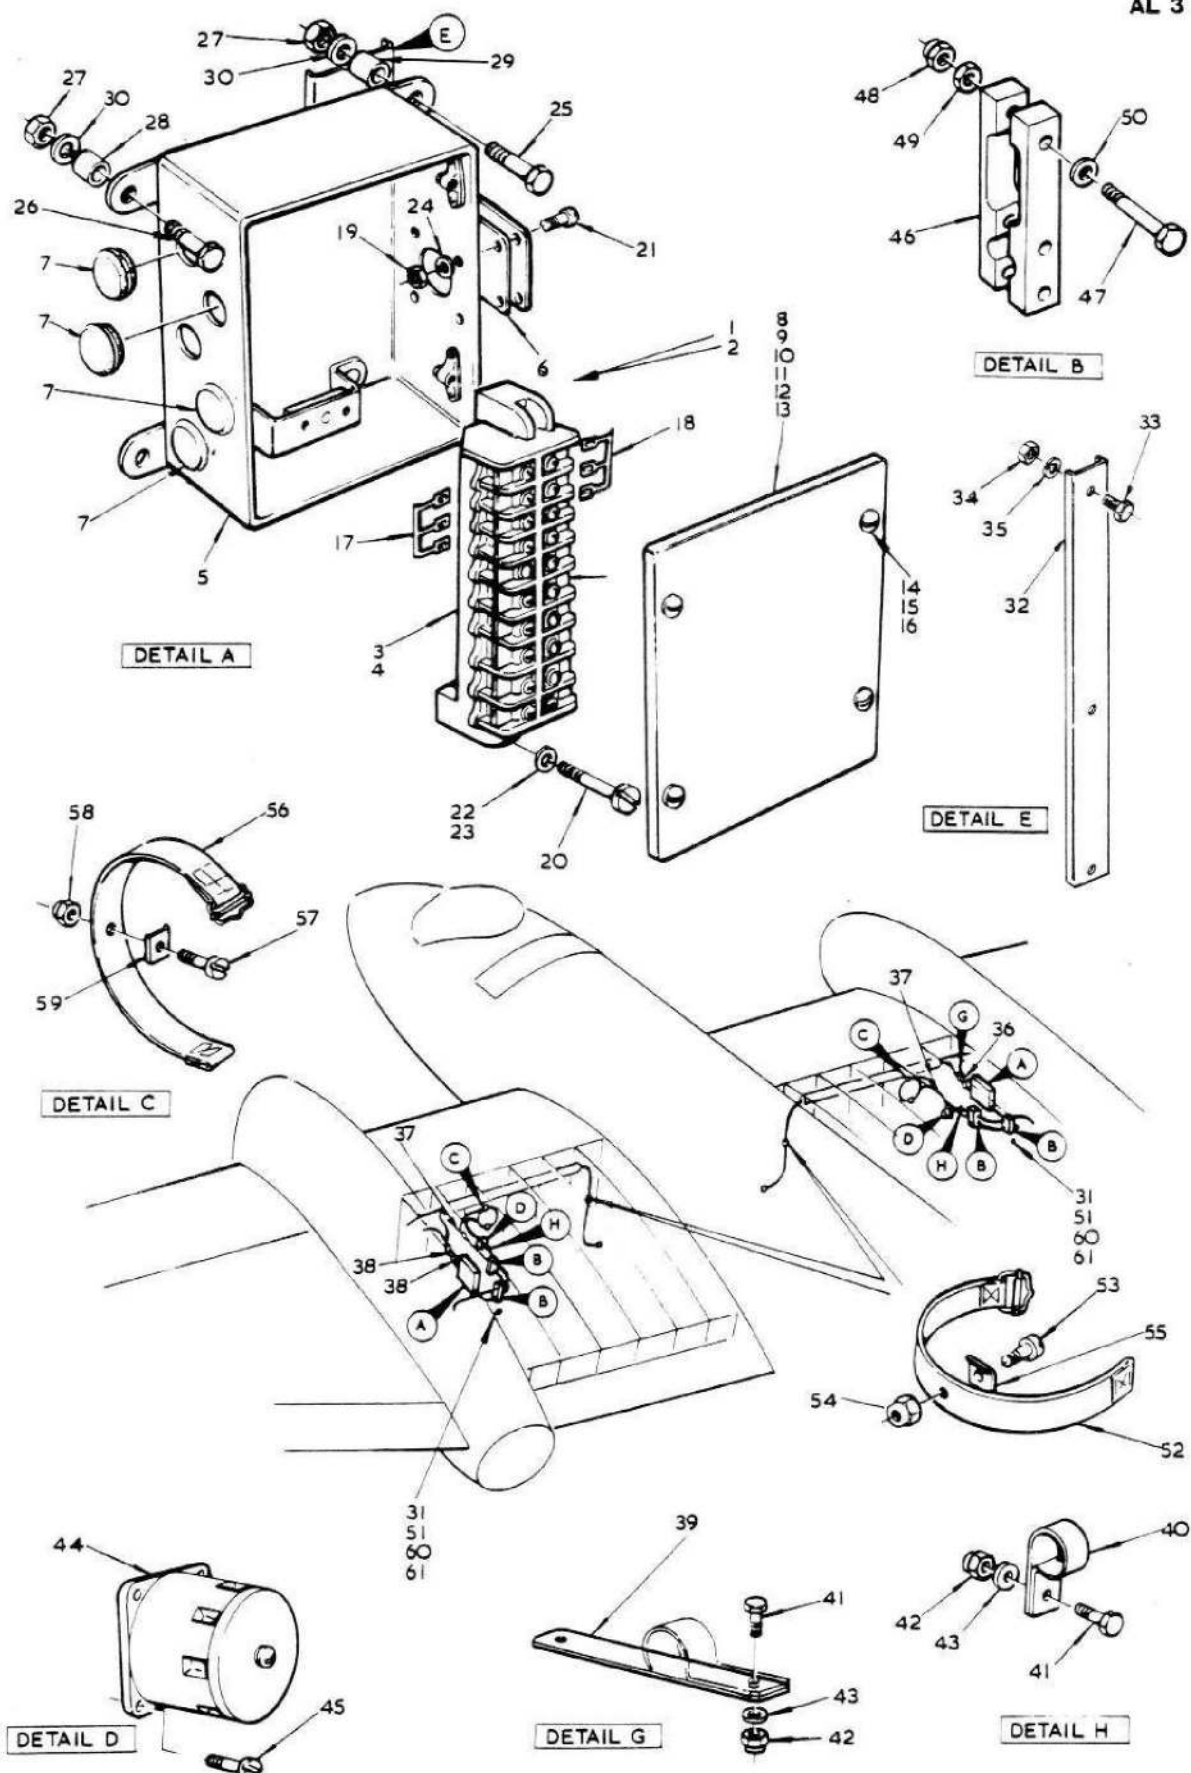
ELECTRICAL EQUIPMENT IN WINGS
